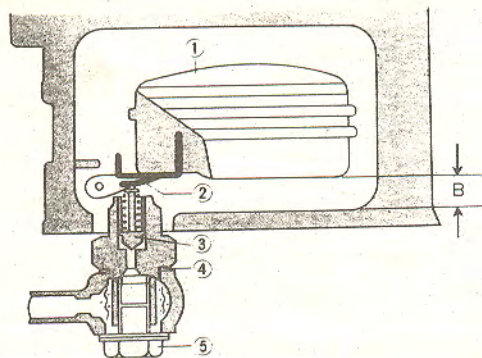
Checking the float level with the carburettor in the inverted position. The important dimension is "B".
